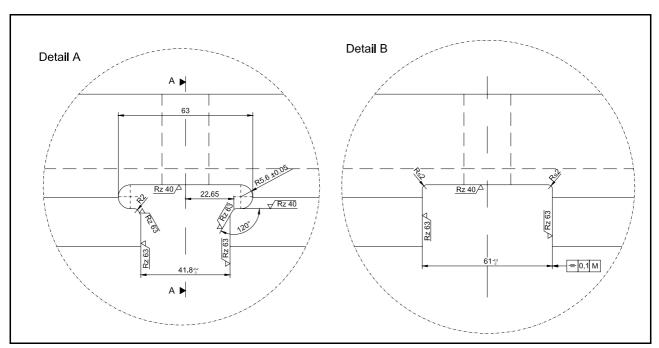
Dimensions and tolerances for designing stator plate incorporation in a steel construction (details A and B)
